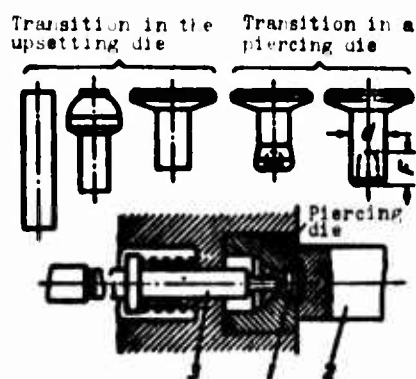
Two-position upsetting semi-hollow rivet on a specialized automatic machine.
